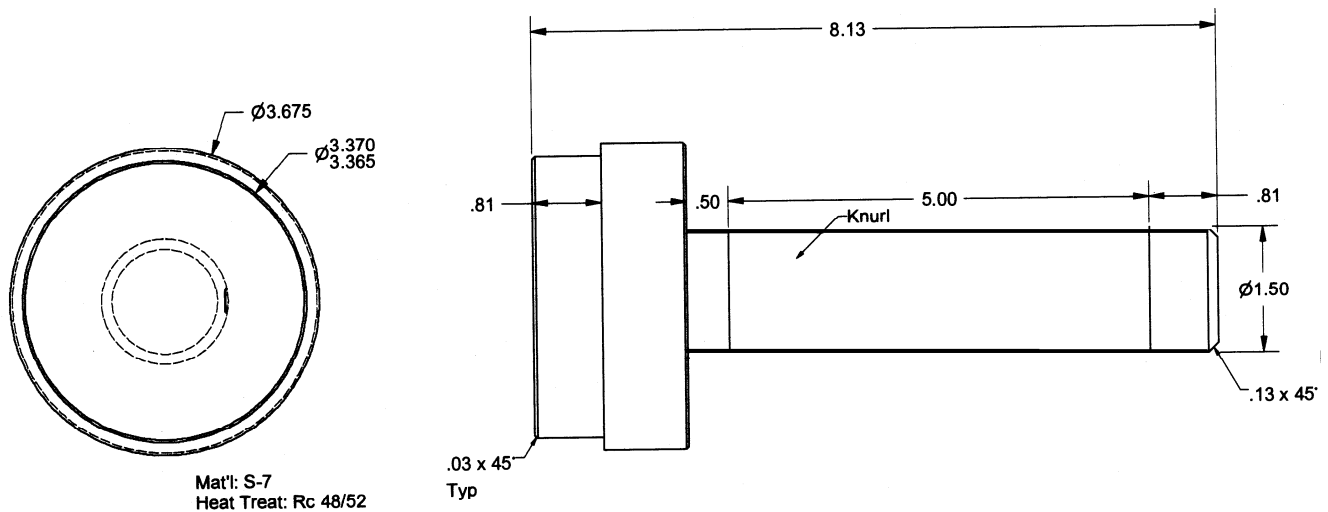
INSERT DRIVER (EQ144021-02)
